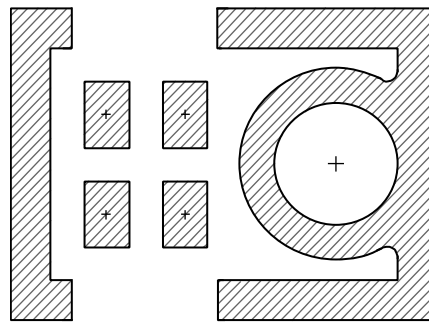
Example PCB Land Pattern with Broken Enclosing Rectangle
